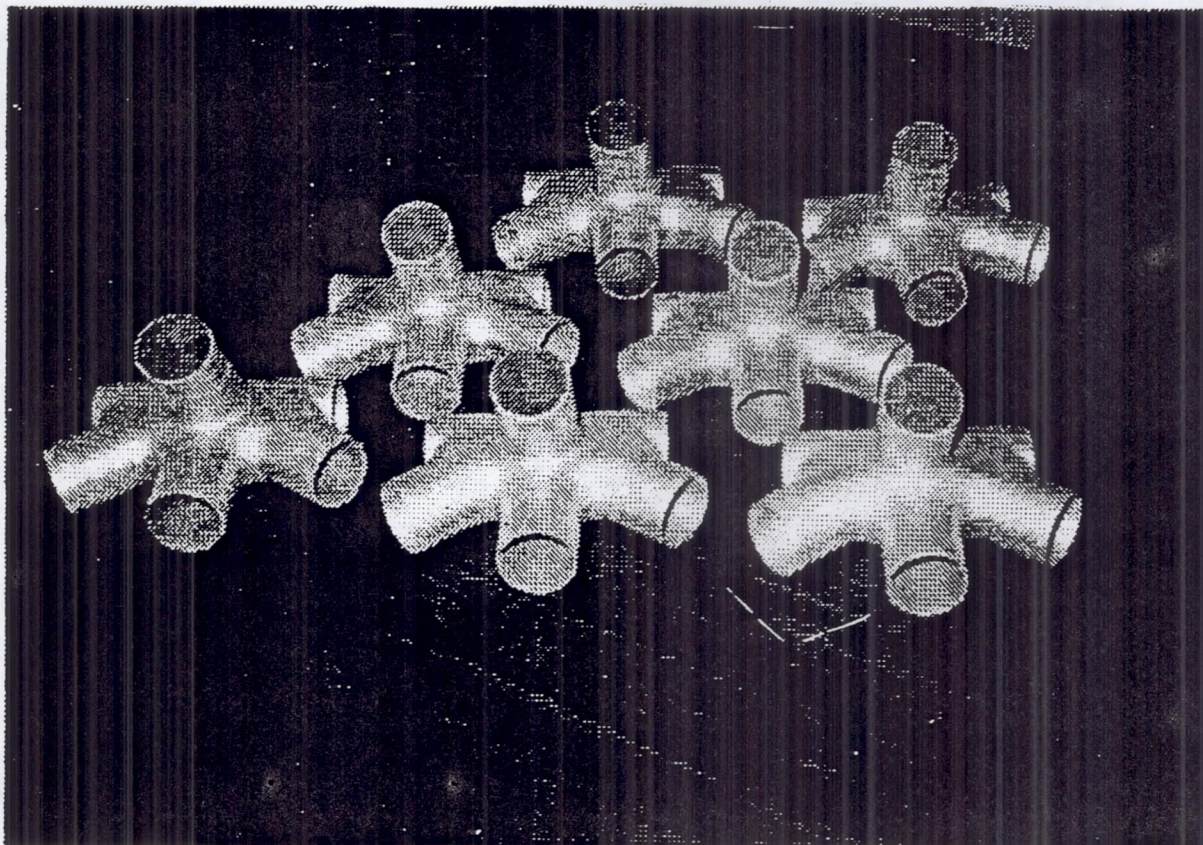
Forged/Machined End Fittings, Ready for Heat Treatment and Assembly Installation.
